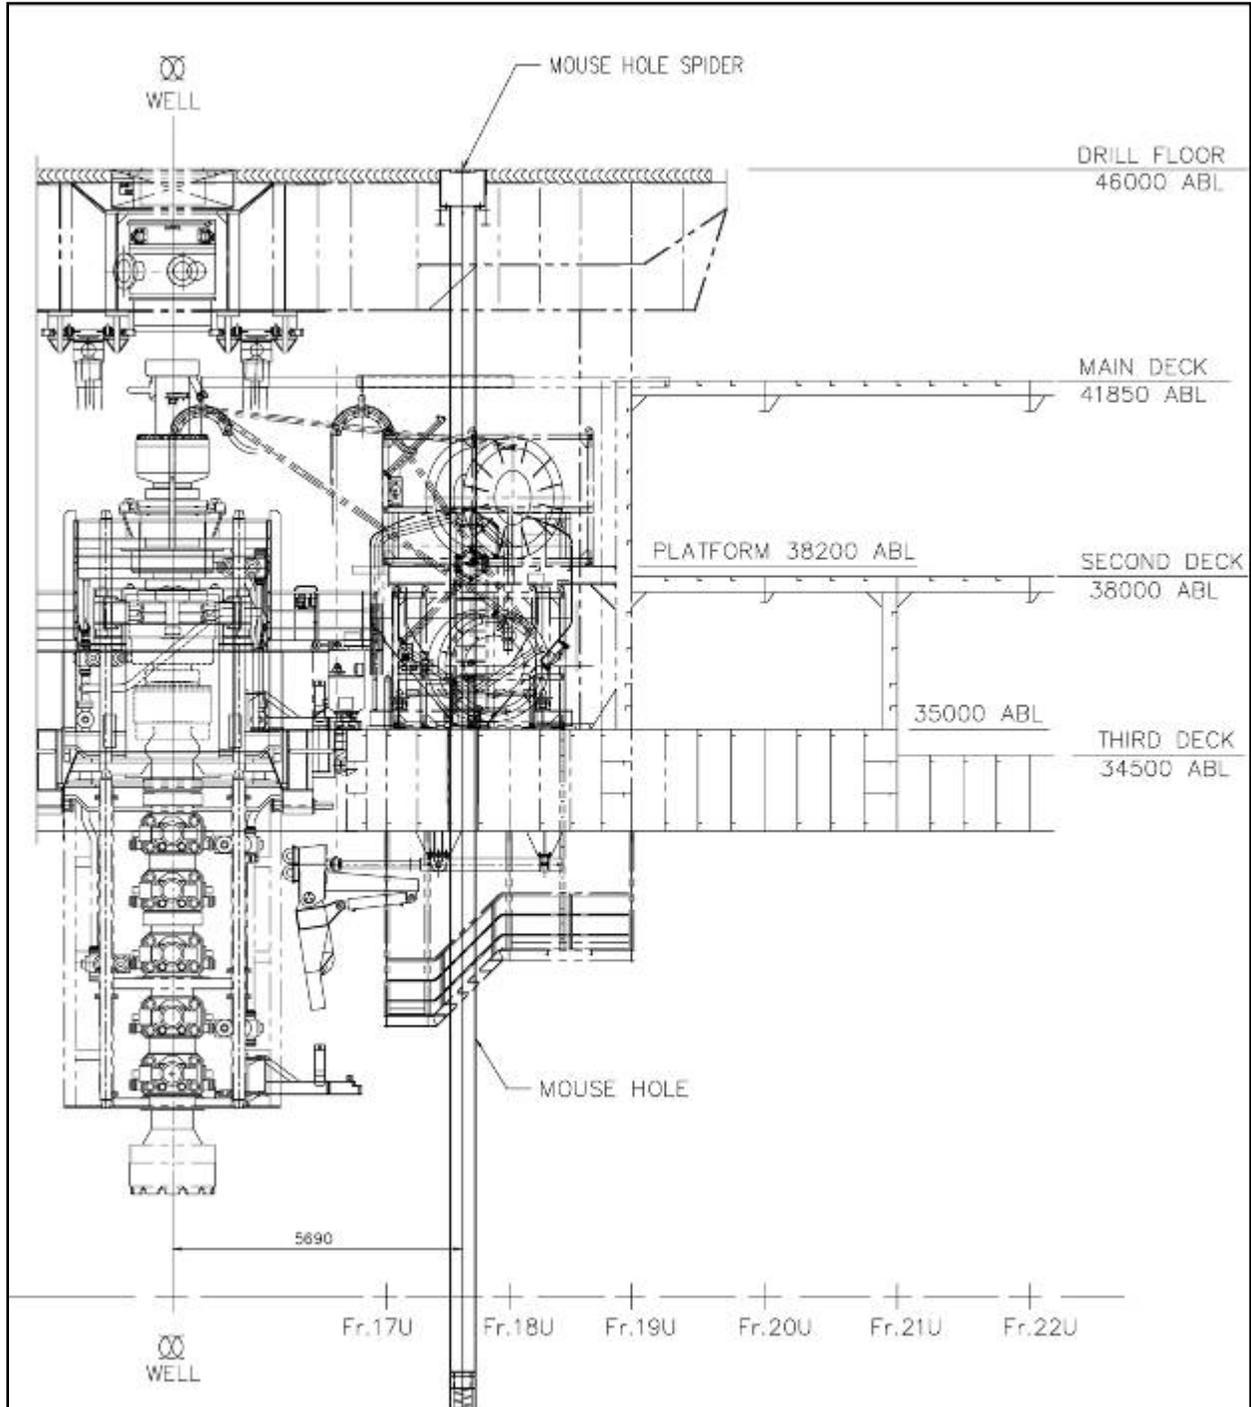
Riser at Well Center through Drill Floor (HRBS-M69-U01-H7005, rev.0)
